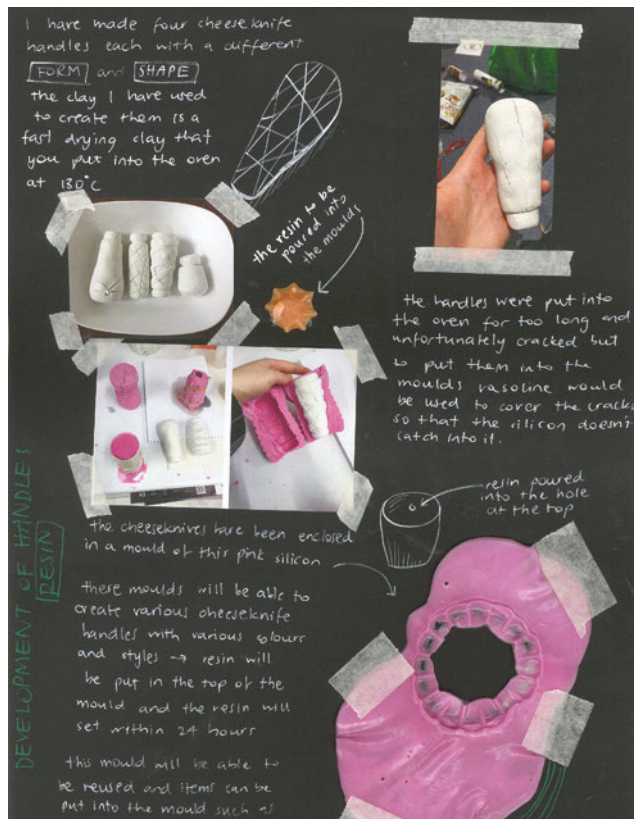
Gabbi Rynia worked with moulds and resin when developing a concept for a cheese knife.
